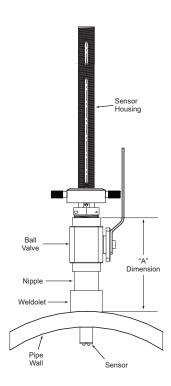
Hot-Tap installation with "A" dimension using a ball valve, short nipple and weldolet (threadolet)
